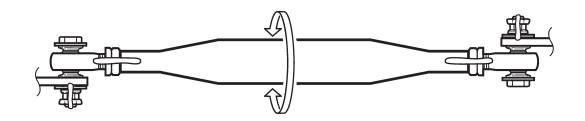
A ROD END CENTERING (Position rod ends for maximum rotation)
